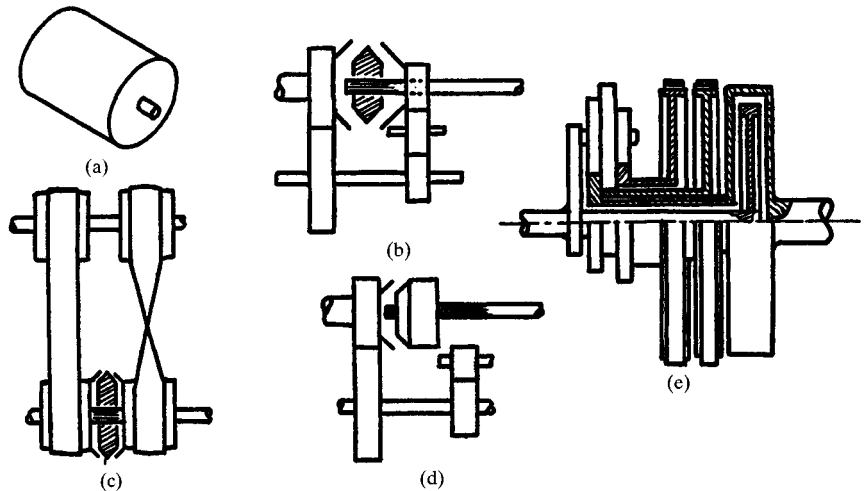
Reversing mechanism. These mechanical devices change the direction of rotation of the output. (a) Reversible prime movers; (b) reversing gears; (c) reversing belts; (d) transmission; (e) epicyclic gears as in Model T Ford.
